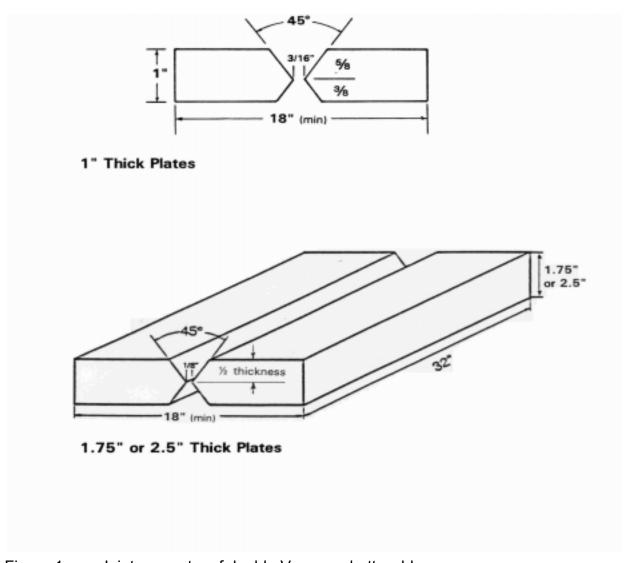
Joint geometry of double V-groove butt welds.
